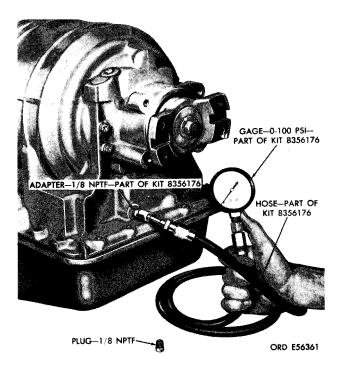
Pressure gage attached to ½ NPTF pressure check point (gage, adapter, and hose are part of kit 4910-572-8612 (8356176)).
